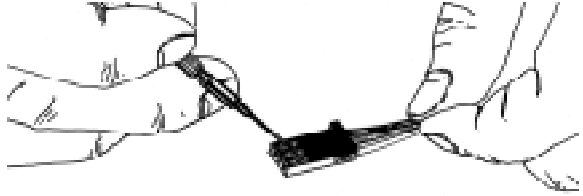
With the screwdriver, carefully lift each of the metal locking tabs to the angle shown.
